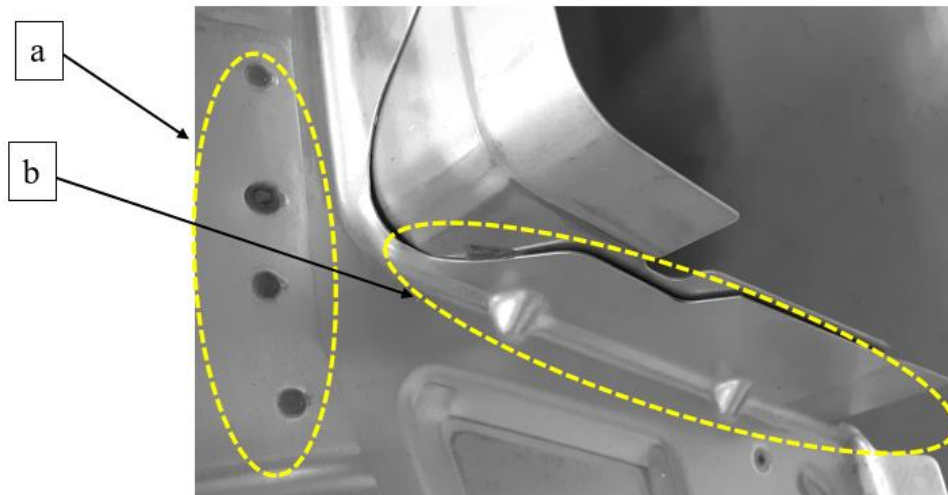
(a) Four weld nuggets, (b) unconnected flange due to assembling process.
